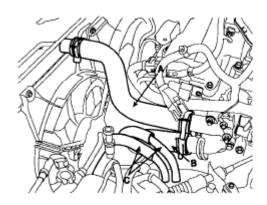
Identifying Water Inlet Fitting, Gasket & Thermostat Courtesy of HYUNDAI MOTOR CO.
